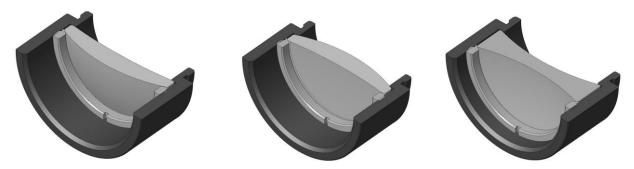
Different lens geometry centered by the same tube and ring using the edge mounting.
